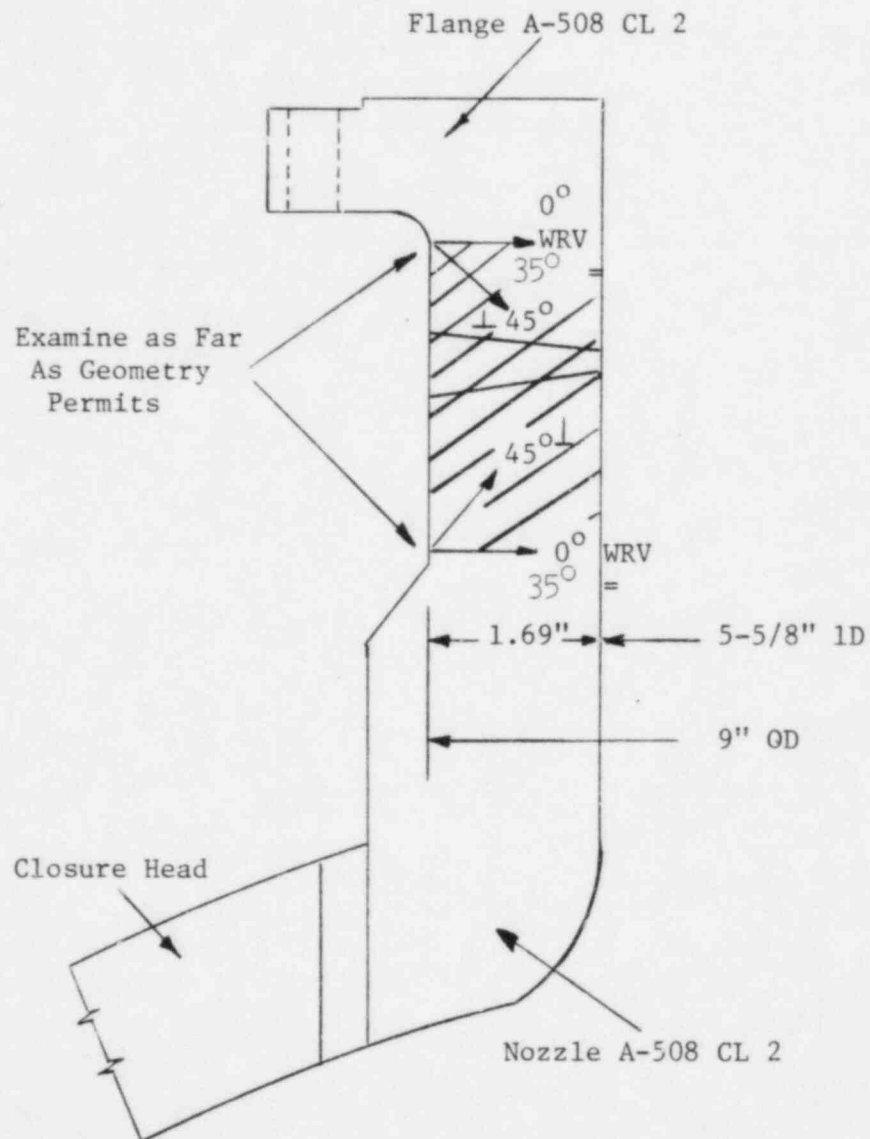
Ultrasonic Examination Procedures for Closure Head Instrumentation (N6) Nozzle to Flange Welds. Cal. Block "VENT"
